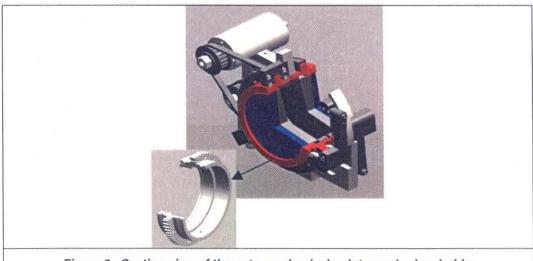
Section view of the opto-mechanical pointer and prism holder
